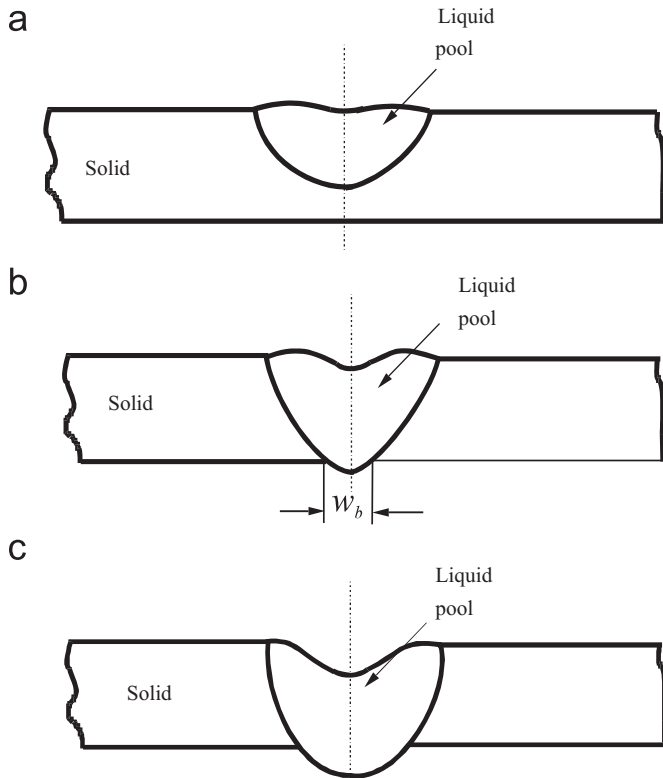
Weld pool and penetration: (a) partial penetration; (b) full penetration; (c) over-penetration.
